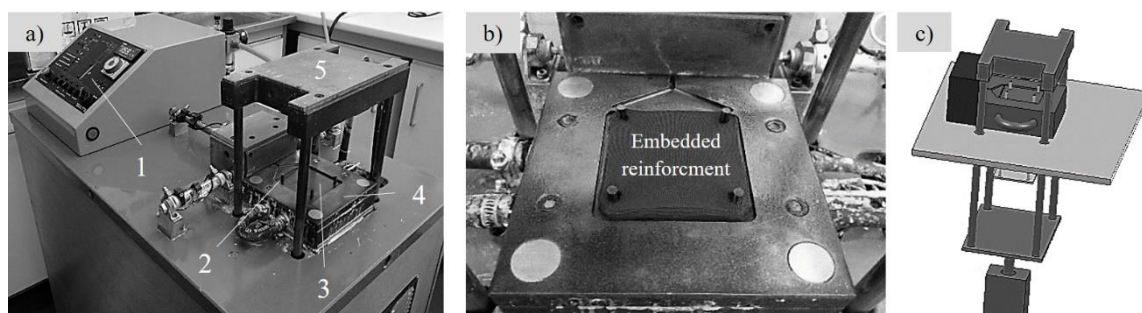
a) Prototype equipment for reactive injection molding of nylons (NYRIM) (1-Thermal hydraulic controller, 2-Extractor beam, 3- Mold cavity, 4- Fixed bottom mold, 5- Dynamic top mold); b) In-mold reinforcement installation; c) CAD Progression due to reinforcement installation assessment.
